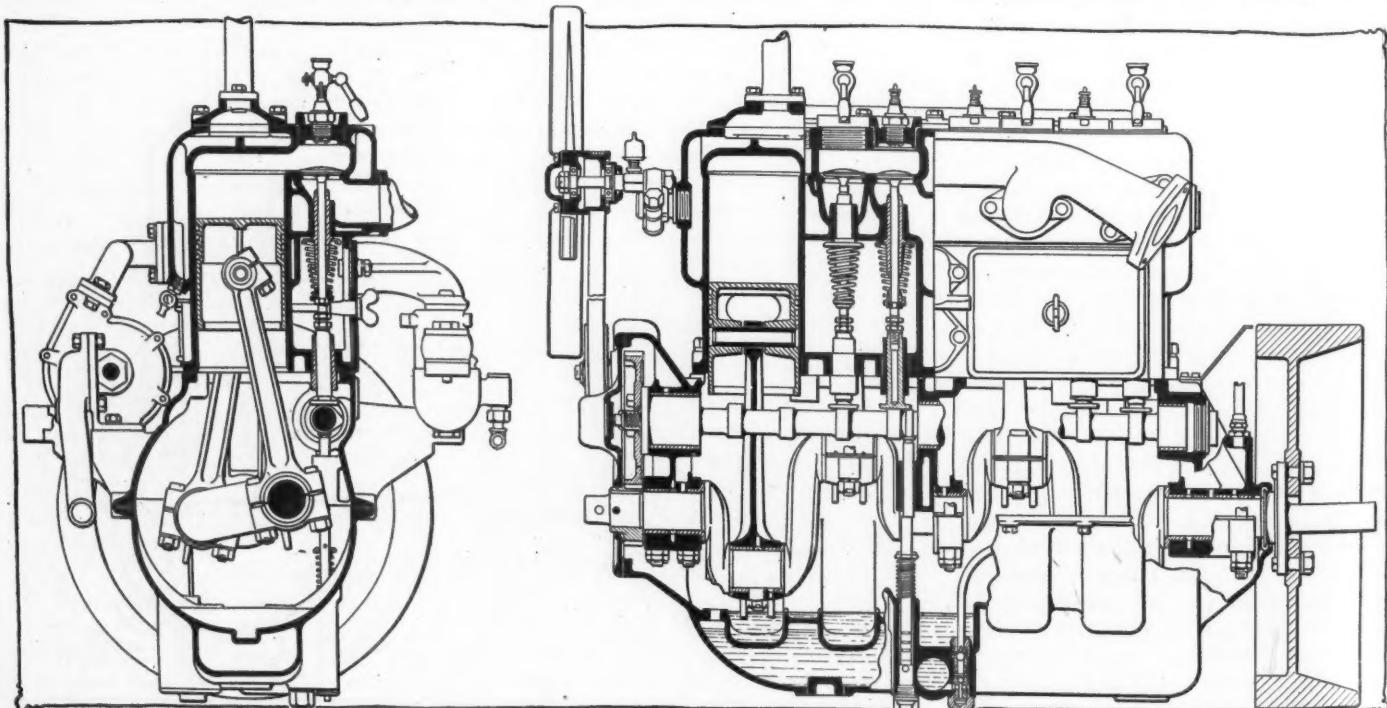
END AND SIDE SECTIONAL VIEWS OF A CONTINENTAL MOTOR
